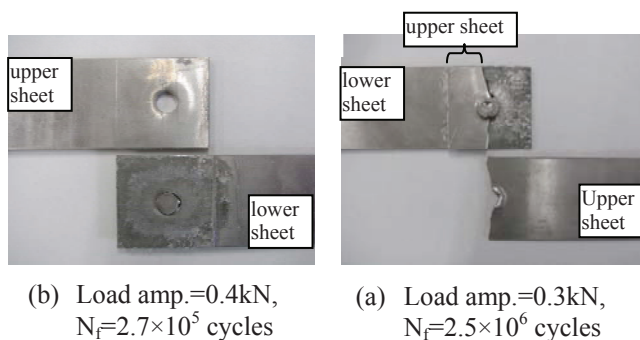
Fracture morphology of adhesive aided SPR joint after the fatigue test.
